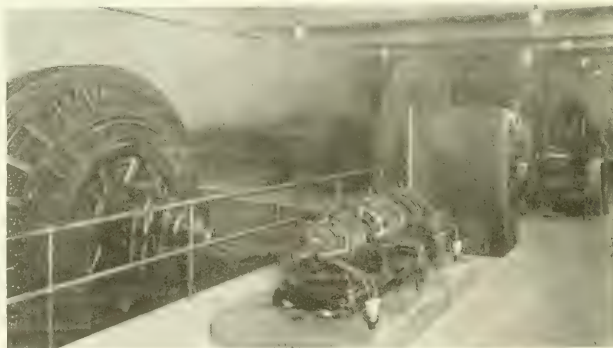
REVERSING EQUIPMENT DRIVING THE ROUGHING STAND OF THE 84 INCH MILL.
